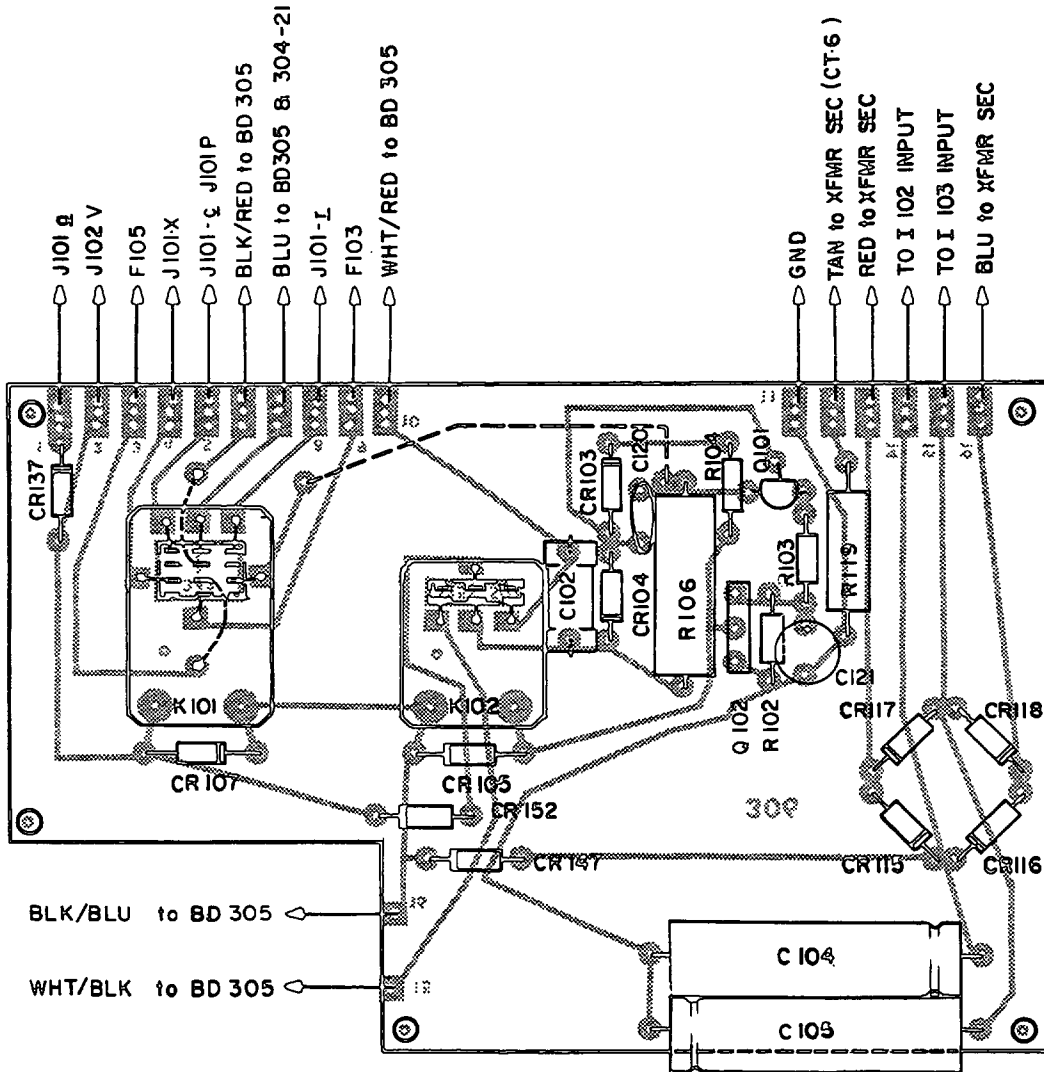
P.C. BOARD ASSEMBLY, BOARD 306, DRAWING
